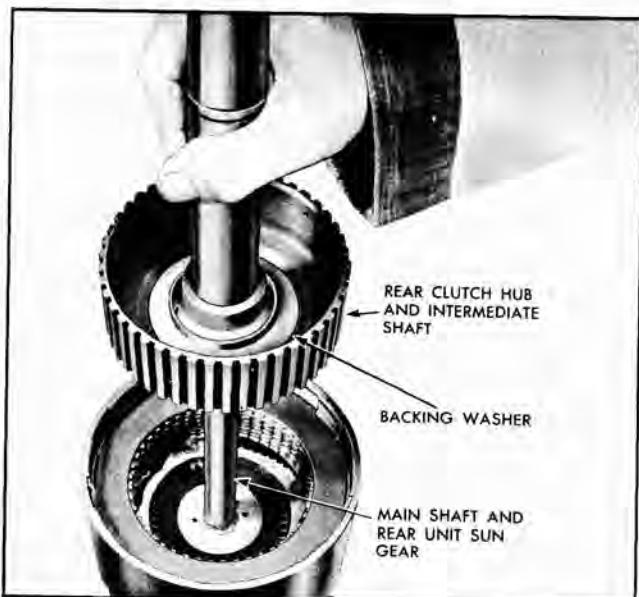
Installing Intermediate Shaft and Clutch Hub into Plates
